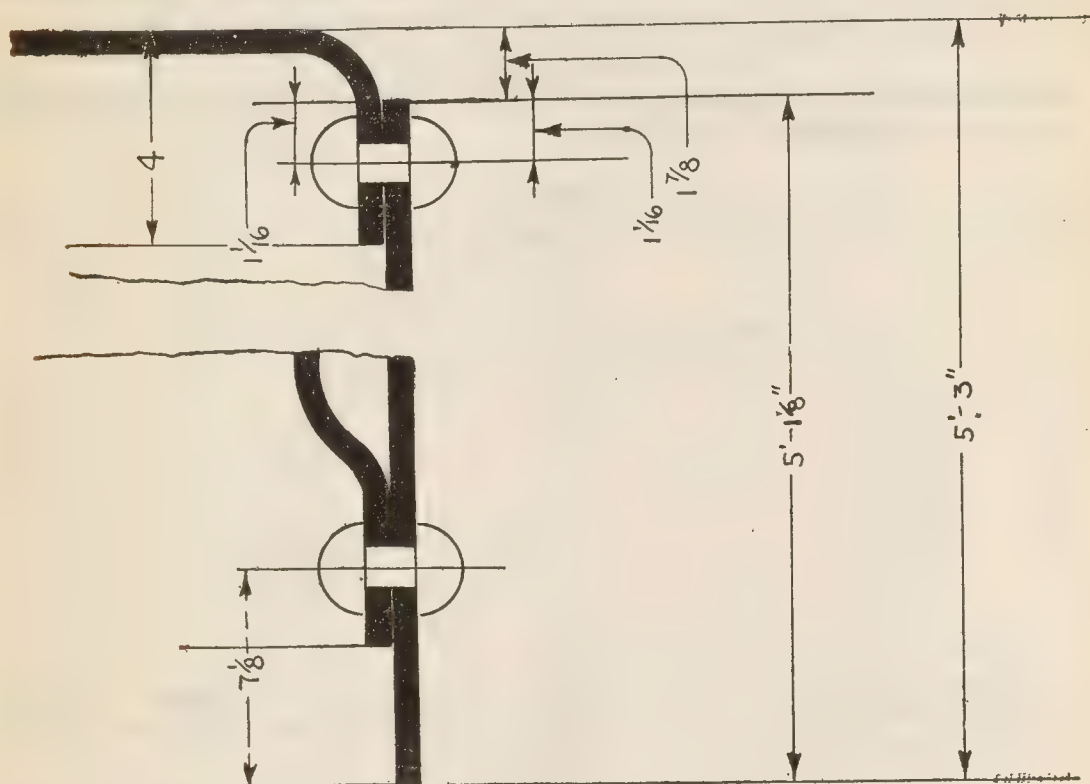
,720.—Detail of shell and upper and lower circumferential riveting for finding distance between lower and upper circumferential rivet lines. In order to illustrate clearly the dimensions, the detail is *not drawn to scale*.
